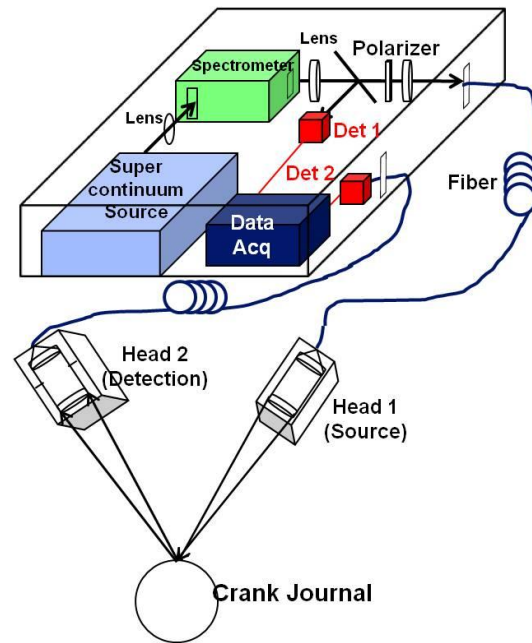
A potential design for in-line surface roughness measurement using the SC laser
